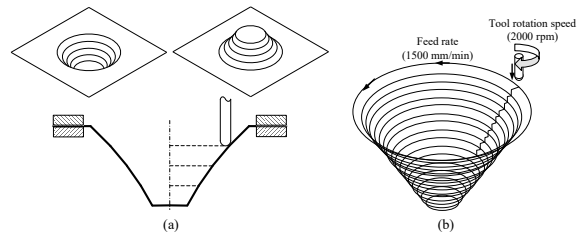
Tool and workpiece conditions; (a) the clamp holder at the four sides of the specimen and (b) the directions of the tool rotation and feed.
